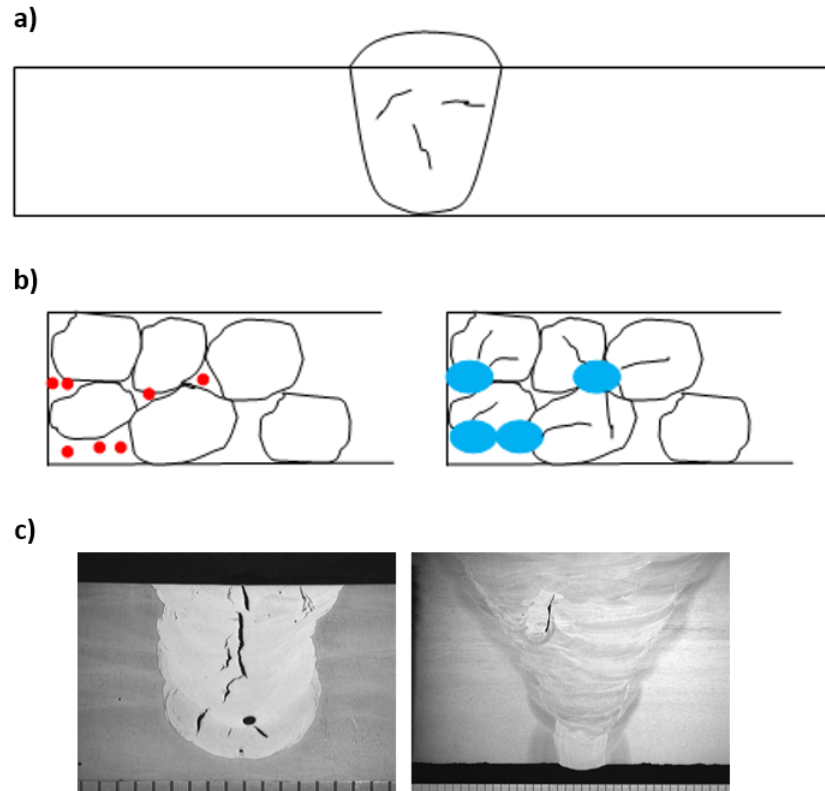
a) Representation of internal cracks in a weld; b) Schematic view of hydrogen embrittlement process; c) Real image showing internal cracks [30].
